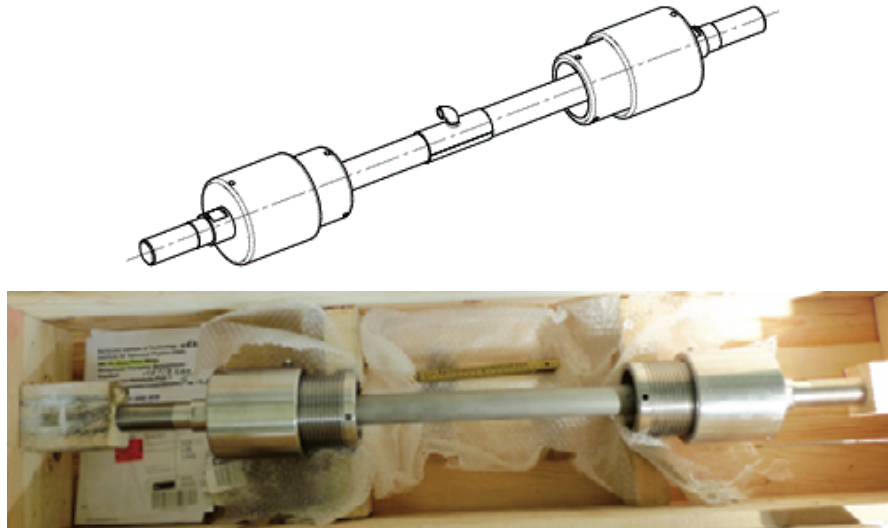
Sketch of the TF He-inlet prototype equipped with mounting fixture provided by ITER, below the first dummy tested in first sub-task up to 500,218 cycles.
